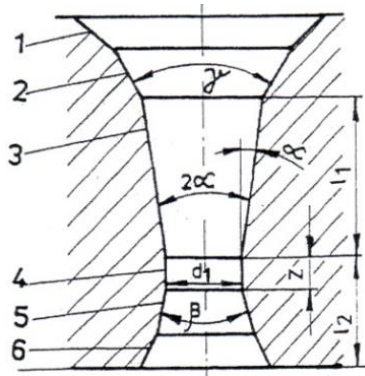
The characteristic areas of the inner geometry of the dies: 1 – entry cone; 2 – lubrication cone; 3 - deformation cone; 4 – calibration part; 5 – release cone; 6 – exit cone; 2α - the angle of the working cone (shooting angle); β - the clearance cone angle; γ - the exit cone angle
